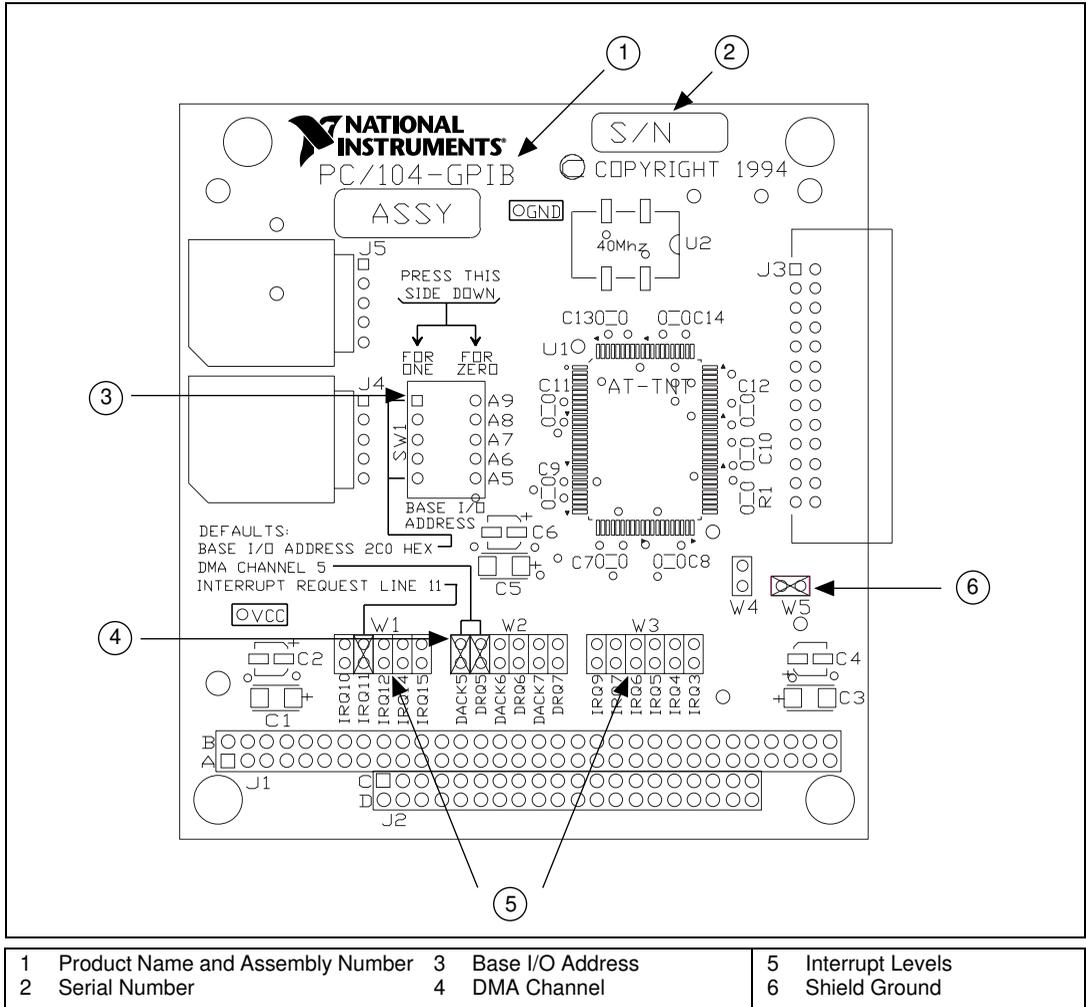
PC/104-GPIB Parts Locator Diagram
